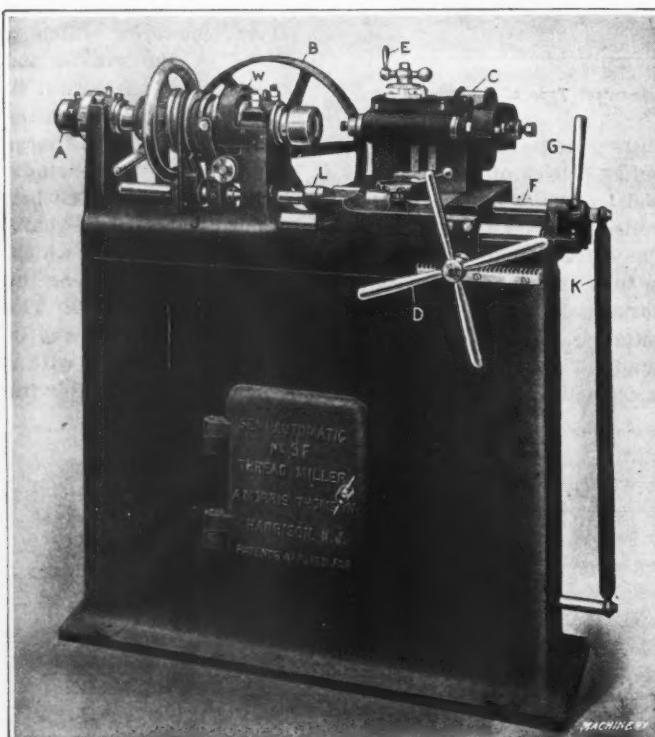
Thomson Thread Milling Machine of Multiple-cutter Type
